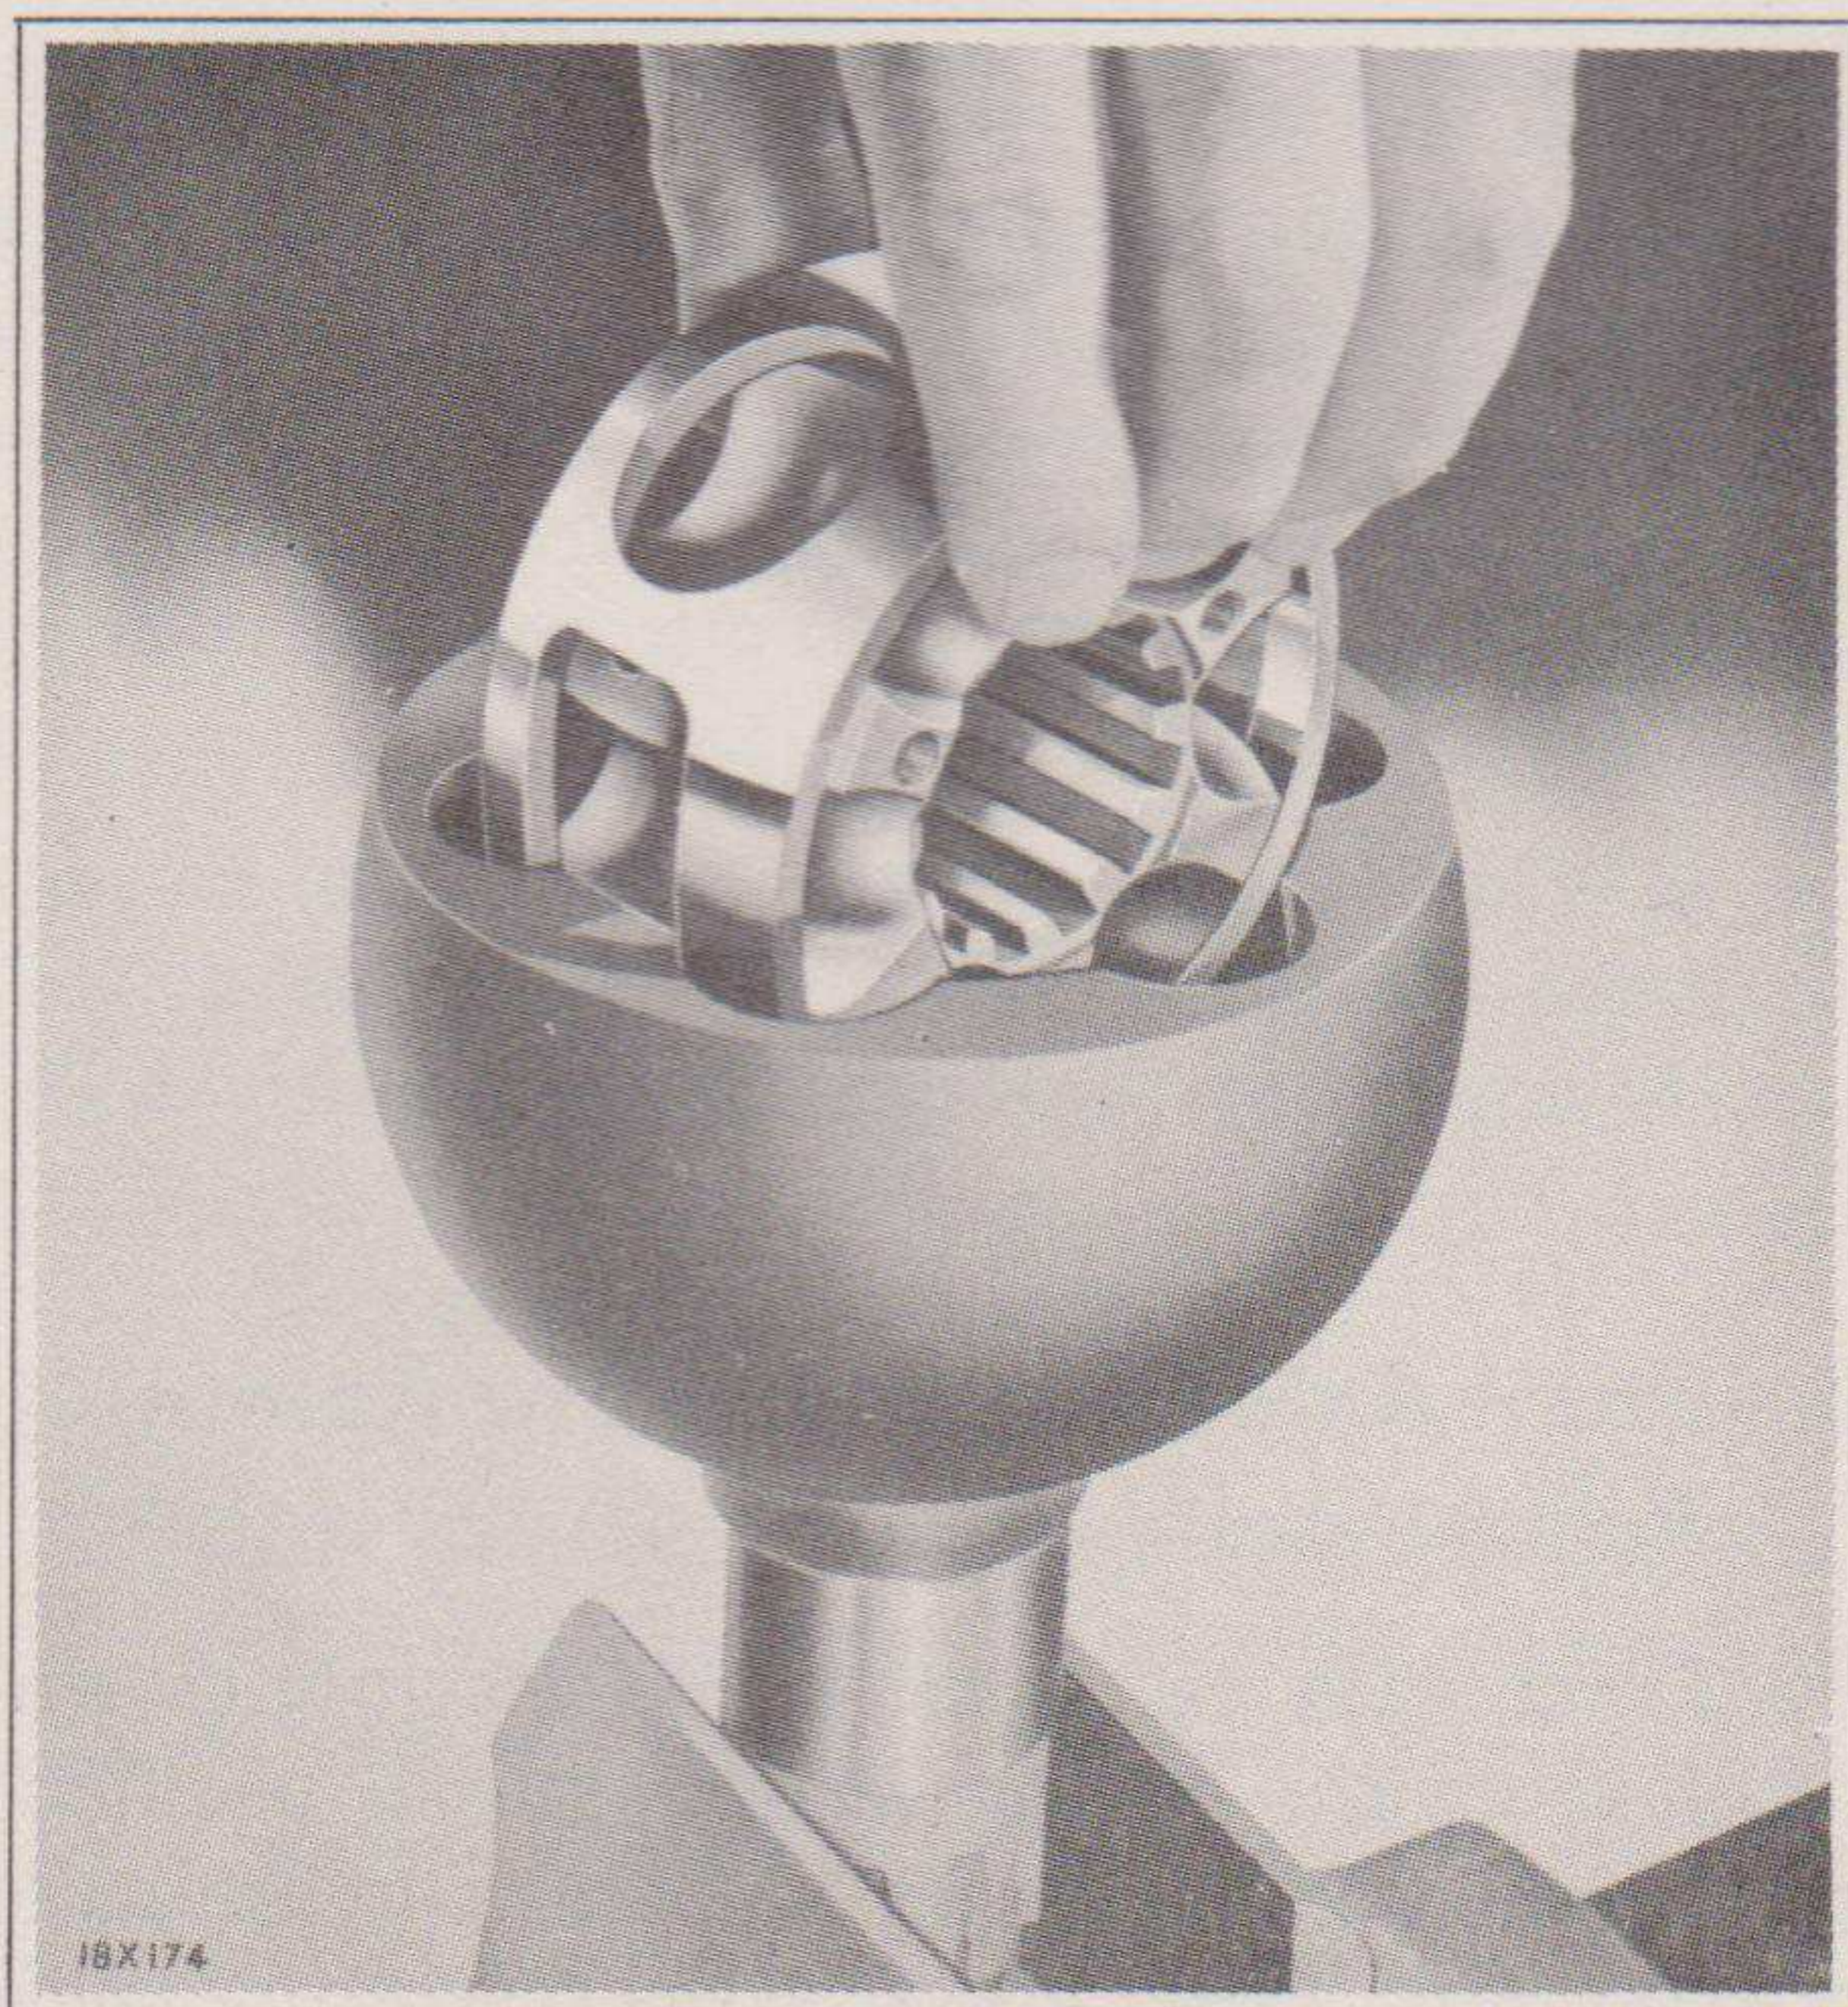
Removing Universal Drive Inner Race and Ball Cage (Rzeppa)
